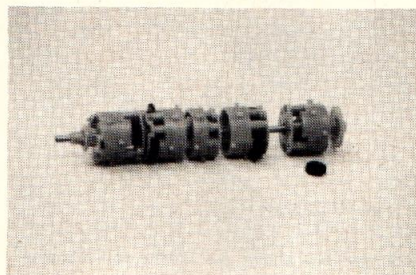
THE PLANETARY GEARING SYSTEM. Don't throw this out! You'll need six  $\frac{3}{8}$ -inch gears from the system.
